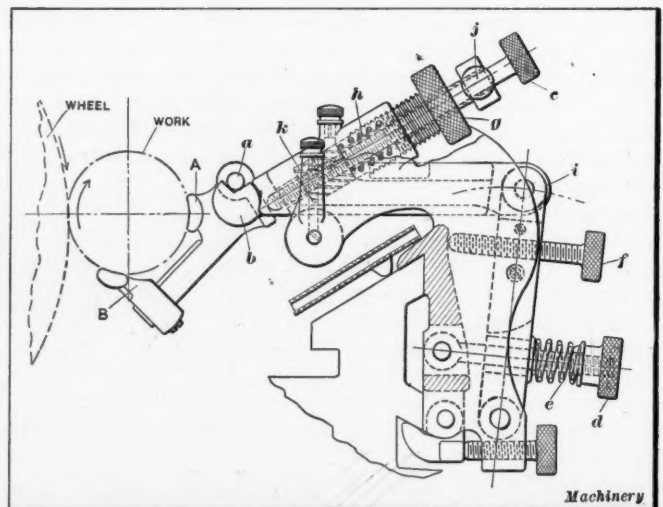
Universal Type of Spring Steadyrest for Use on Brown & Sharpe No. 1 Universal Grinding Machine
